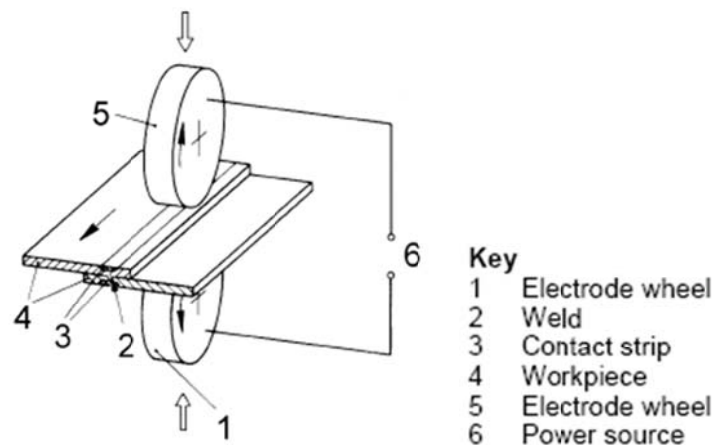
Seam welding with strip (ISO 669)
